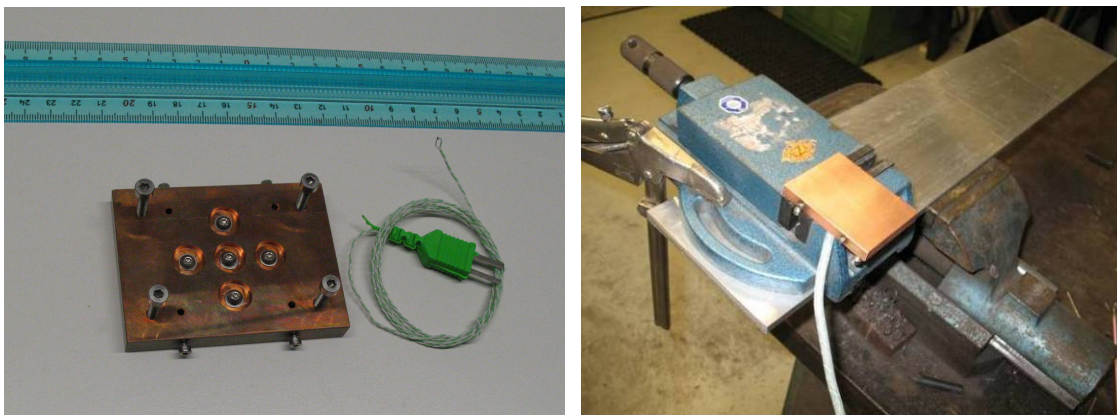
Inertial calorimeter equipment used to characterize the TIG welding machine for tests
